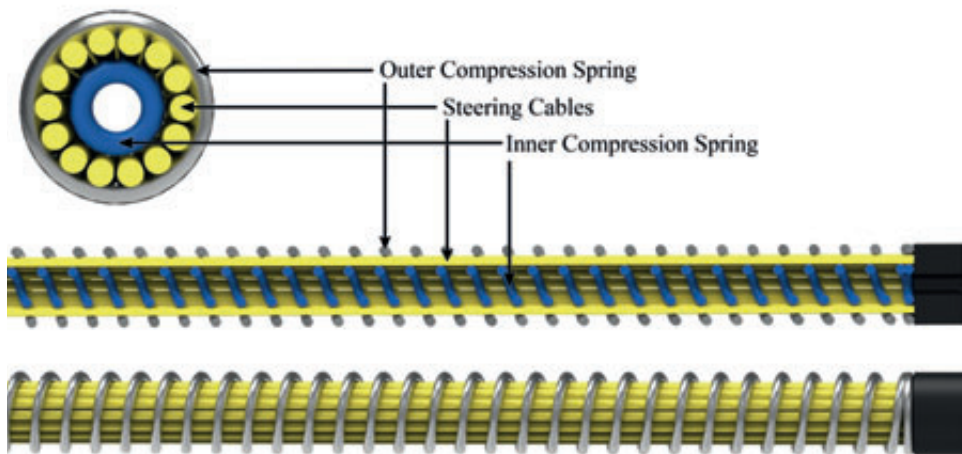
Schematic Illustration of the Patented Cable-Ring Mechanism Invented at Delft University of Technology [16]. The cable-ring mechanism consists of an outer compression spring (silver), a ring of steering cables (yellow), and an inner compression spring (blue)
